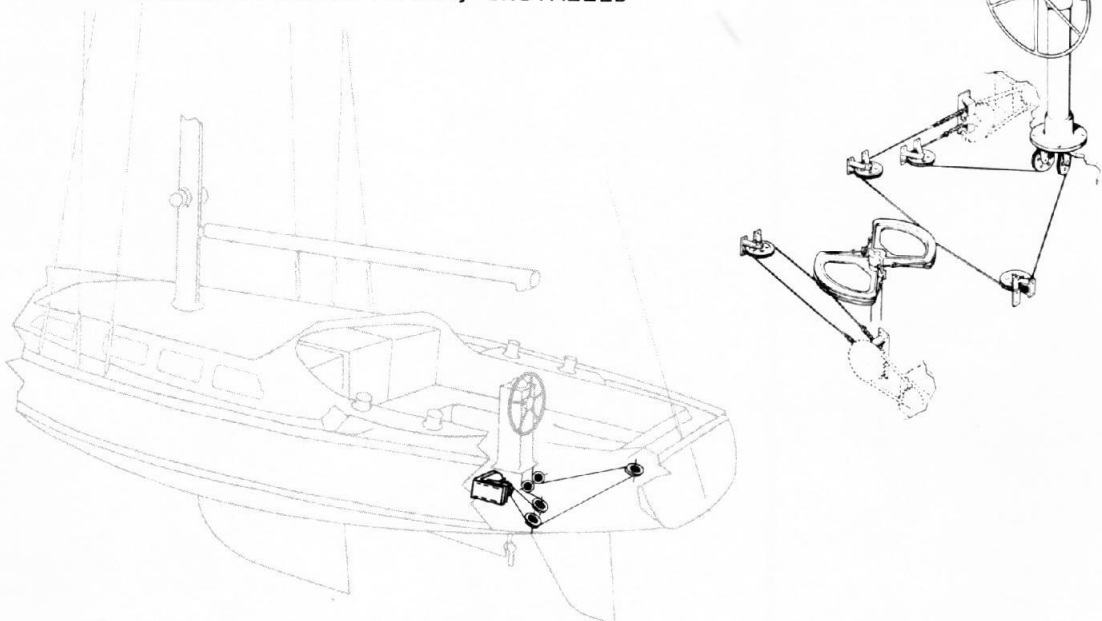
MECHANICAL SERVO MOTOR, IN A SAILBOAT
